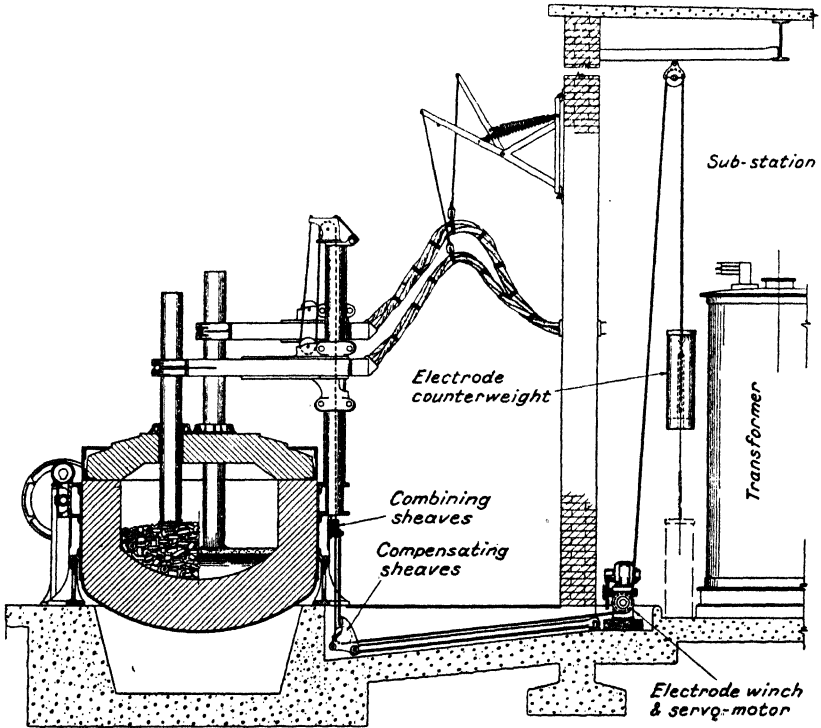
Schematic Diagram of Cross-Section of Furnace with Electrical and Mechanical Gear.
